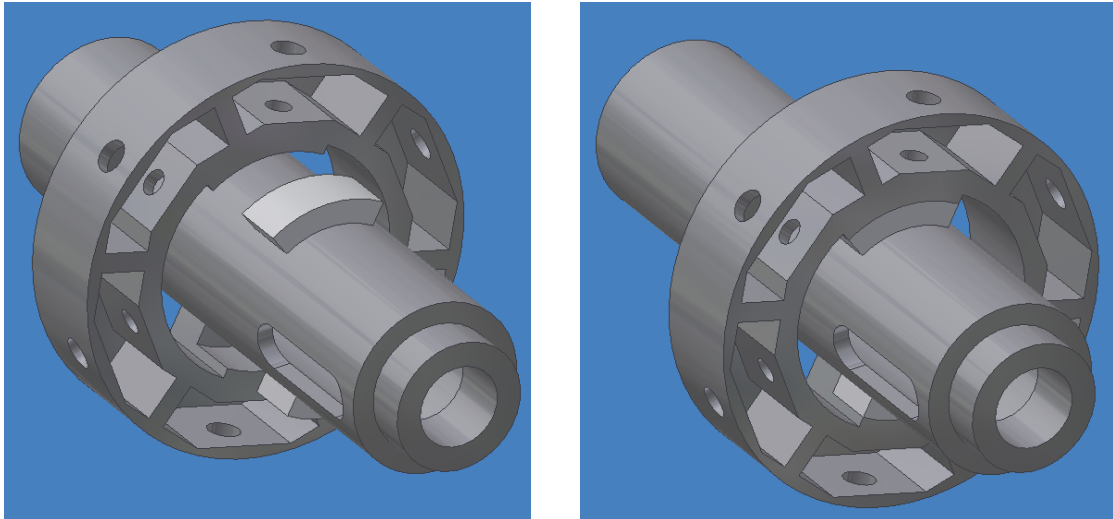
Ring fixed on pulley shaft with use of supports.
